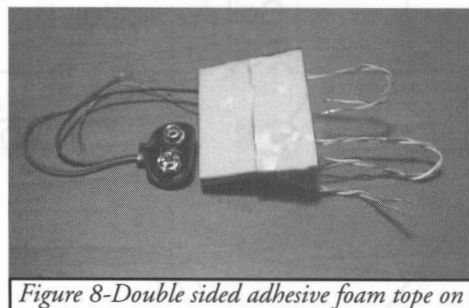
Double sided adhesive foam tape on the bottom of a PCB.
